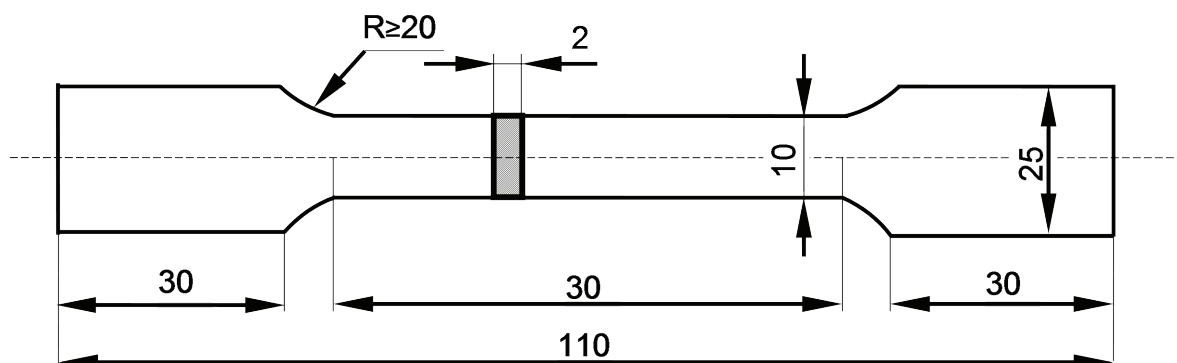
Dimensions of the rGO-PDMS composite for mechanical tests
